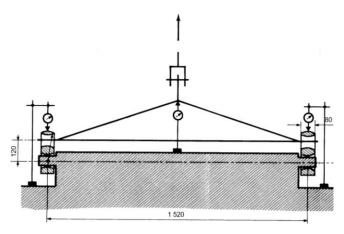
Connections between brake triangles to be tested and test stand for static tests – variant 3 [7]
